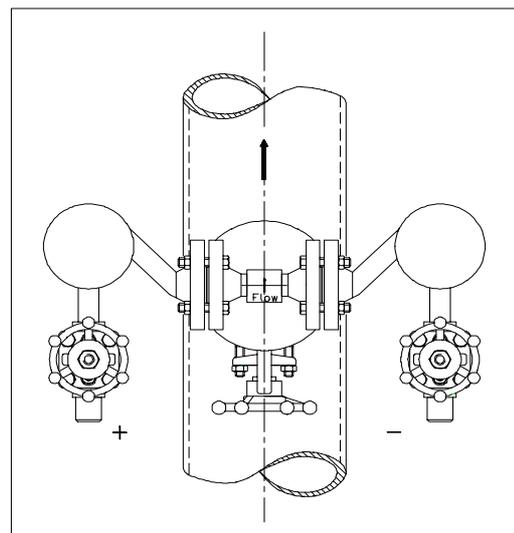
Placement of the differential pressure connecting studs for vertical pipe arrangement
